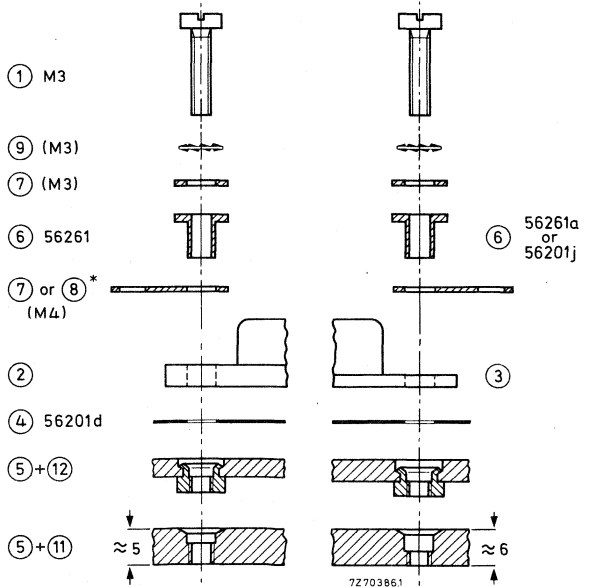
Insulated mounting (500 V) with tapped holes or insert nuts.
